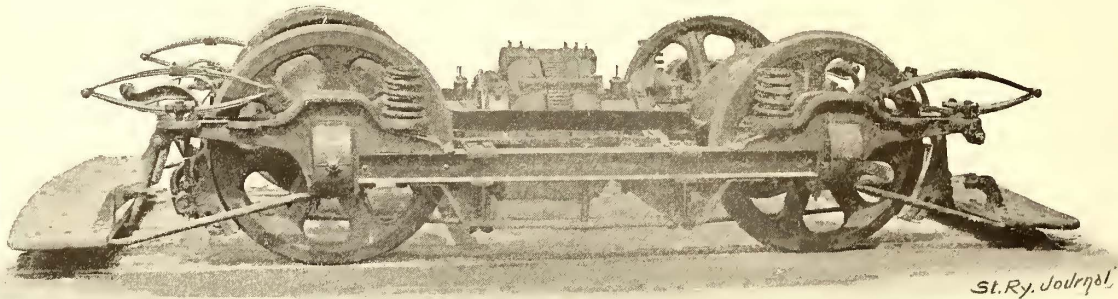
MOTOR TRUCK AND EQUIPMENT.
